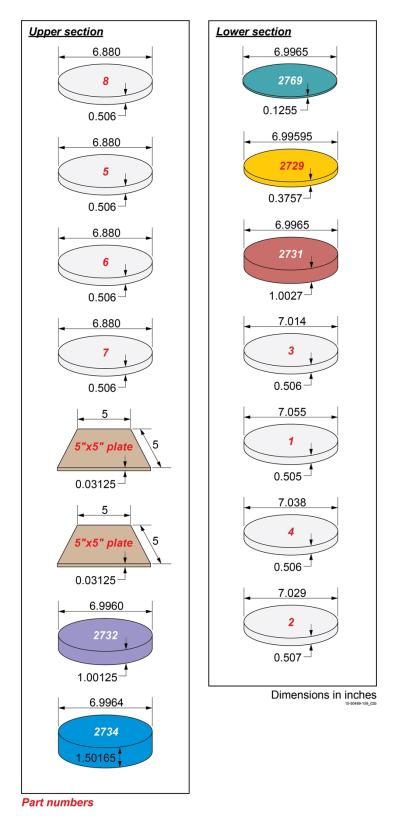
Description of the uranium metal parts for the experiment with 2 in. thick top and bottom reflectors. (Holes in the uranium metal parts not shown),
